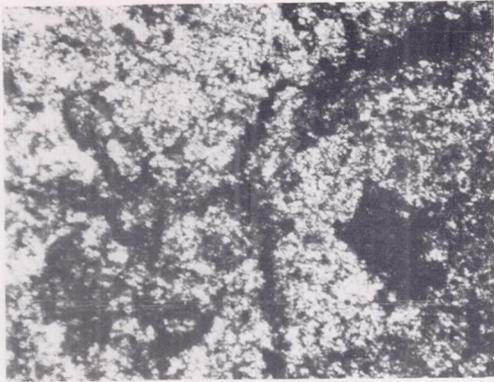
Type N. Cracks representative of those found on surfaces of some welds, X50.
